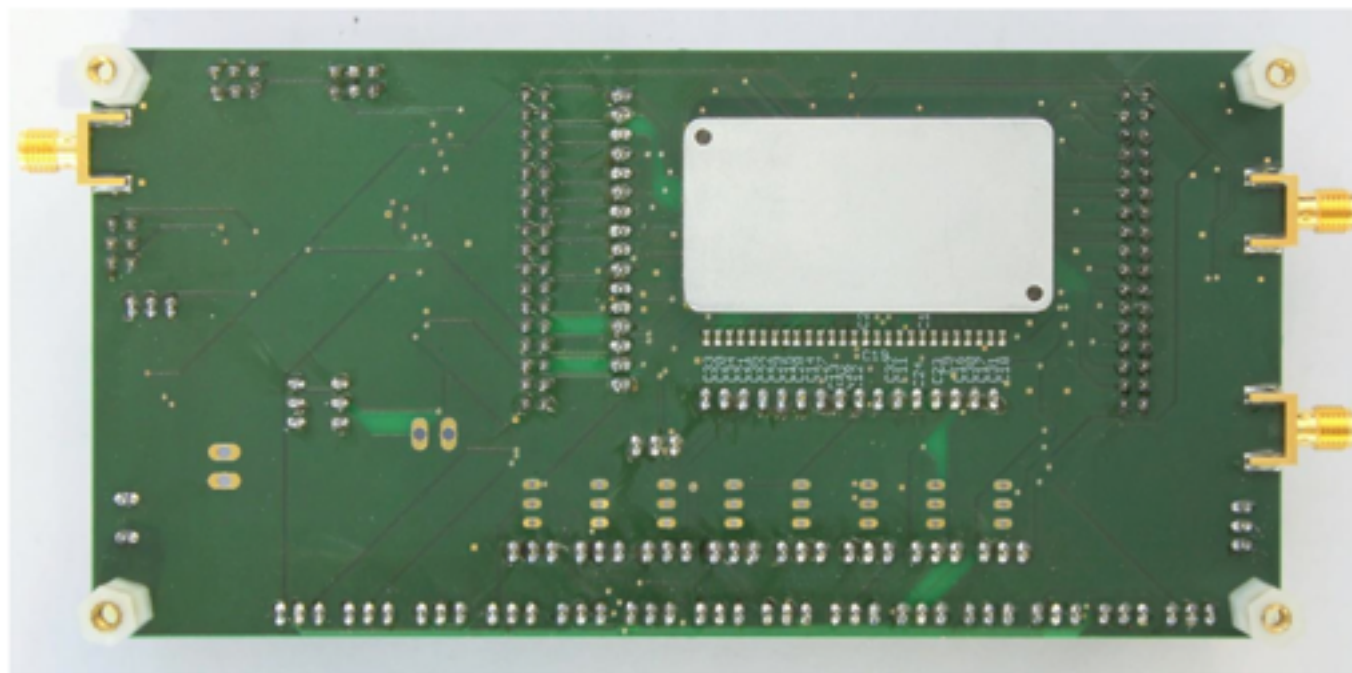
Photograph of the board ASIC side. The IDE1180 is below the cap.
